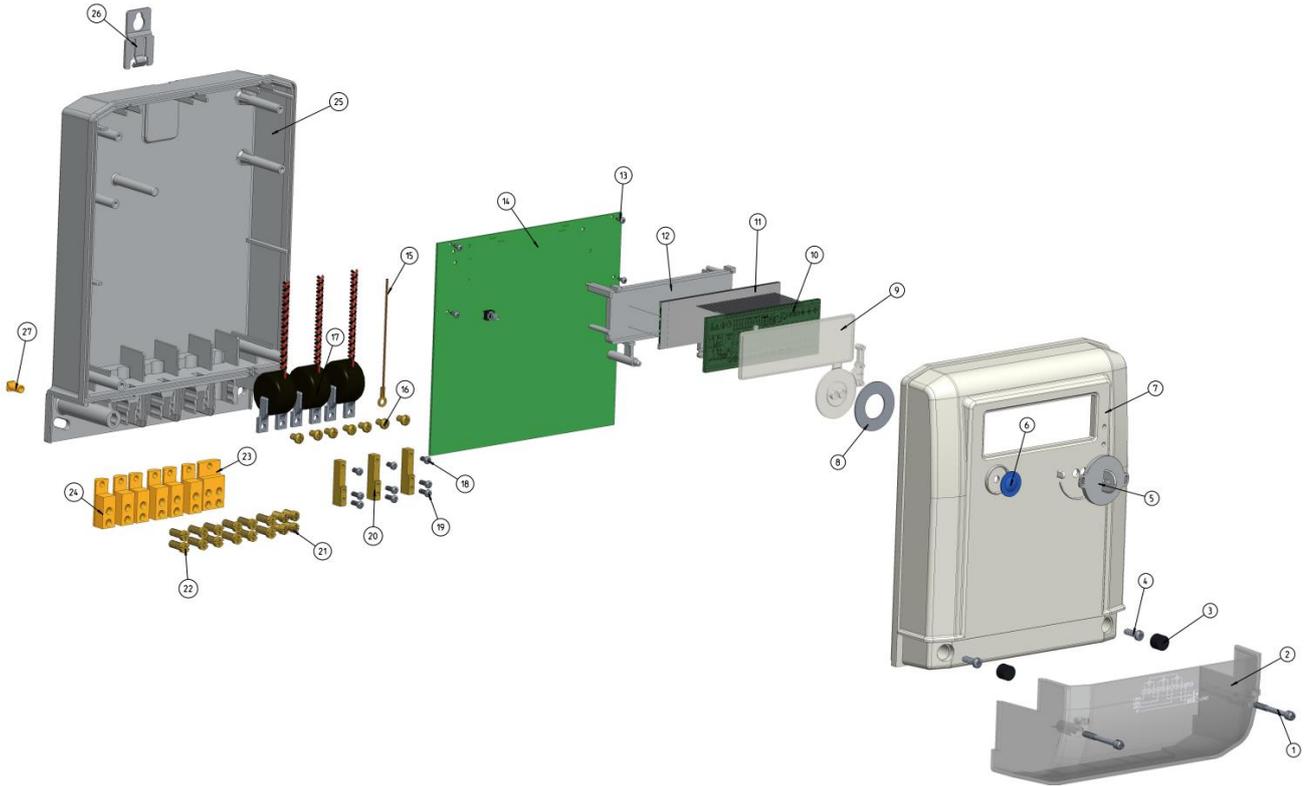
Exploded BoM & Wall Board Mounting Screw Positions
